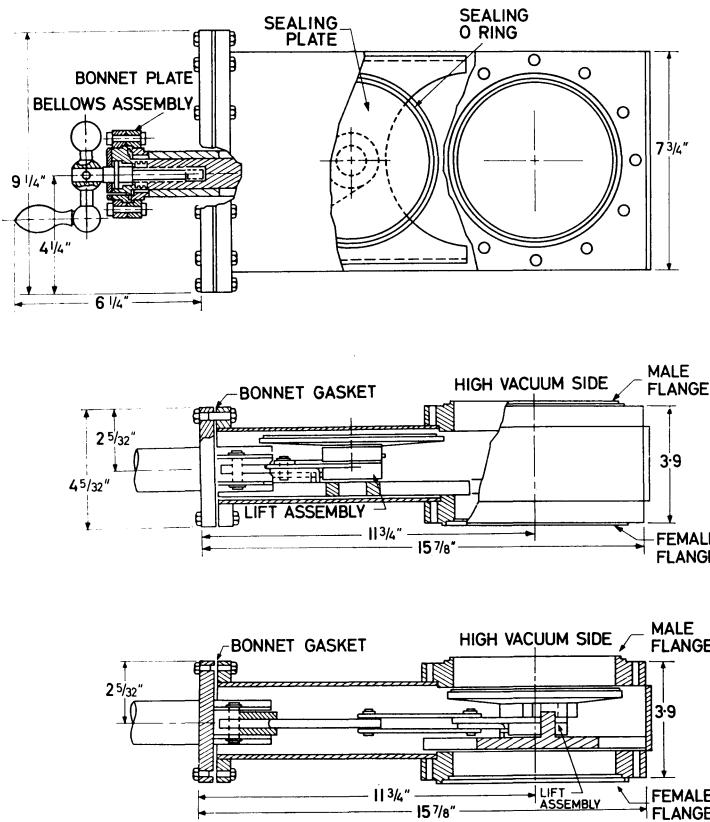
A Dimensions of gate valves supplied by Ultek^{1251a}
